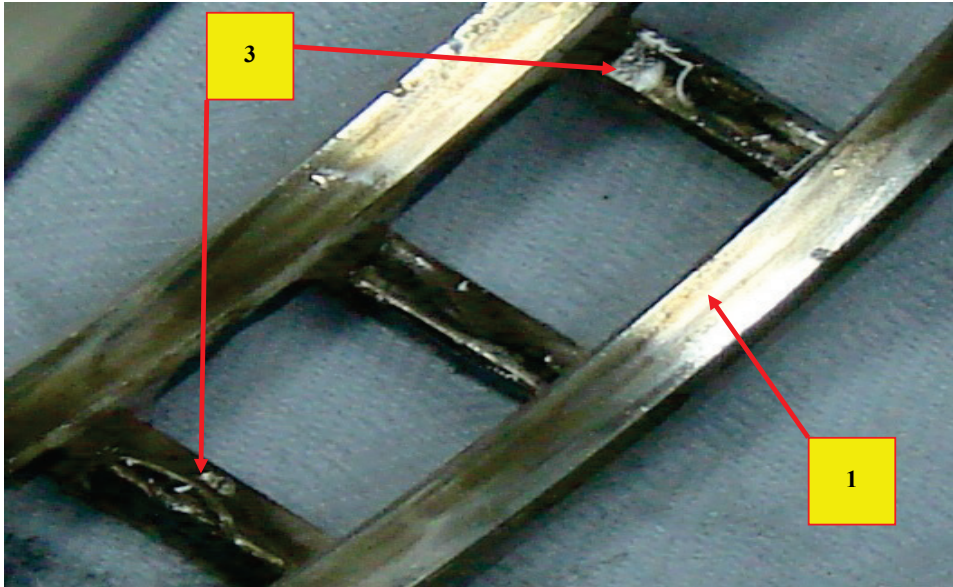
Central bearing cage – close-up: 1 – rubbing marks on the cage perimeter, 3 – flash marks on the edge of the cage separating elements in contact with rolling elements
